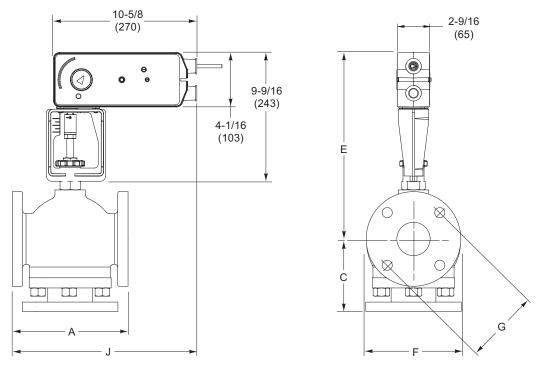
Mx61-720x with 2-1/2" to 4" 3-Way Flanged Globe Valve.
